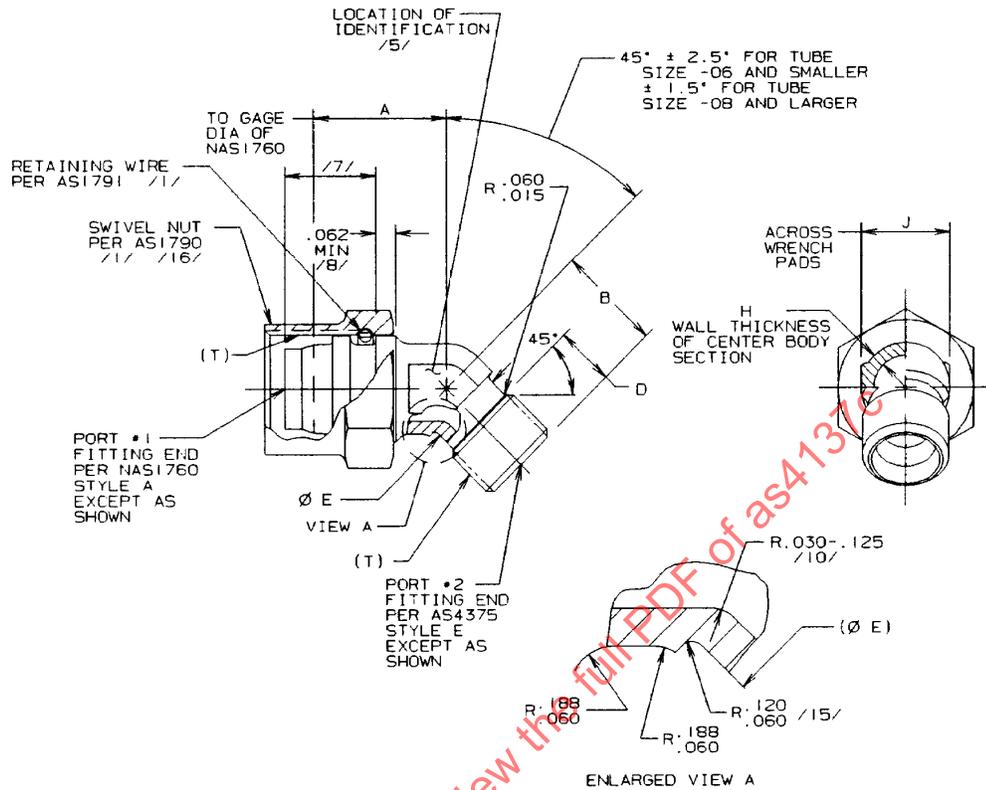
FITTING ASSY, ELBOW, REDUCER, 45°, SWIVEL, REDUCED BODY, FLARELESS
